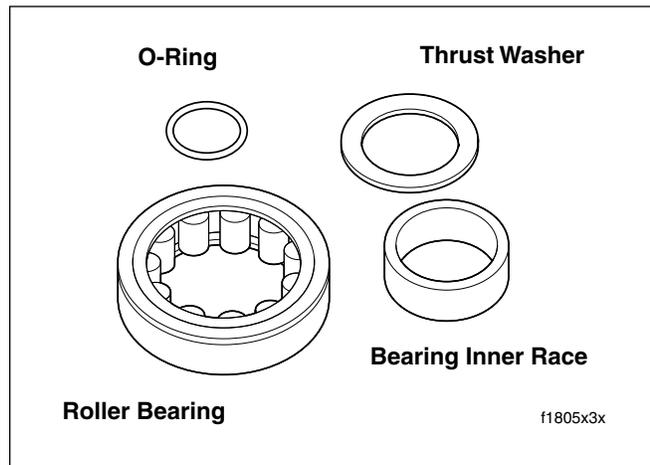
Rear Cam Roller Bearing Kit (P/N 8983)
